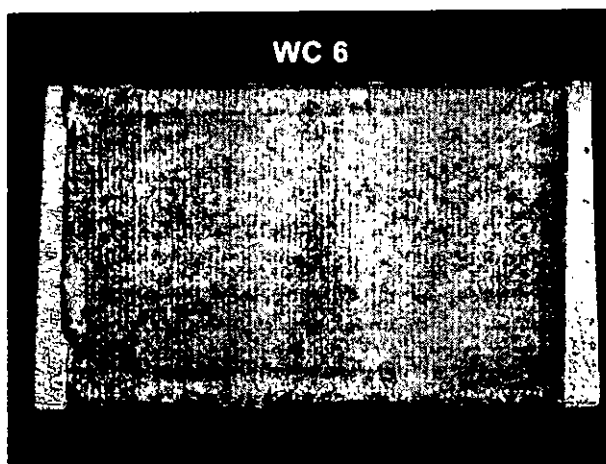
The surface appearance of successful cladding of specimen WC6.
